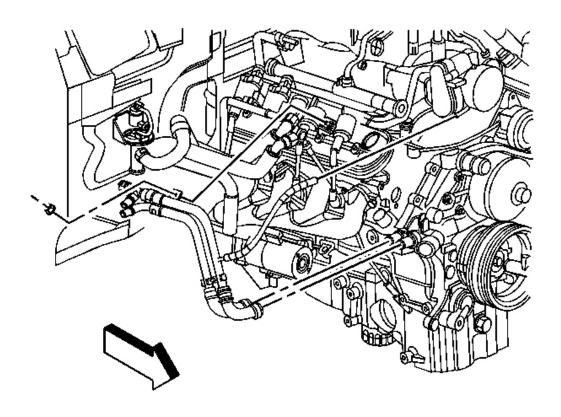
View Of Auxiliary Heater Inlet & Outlet Hoses/Pipes Courtesy of GENERAL MOTORS CORP.
